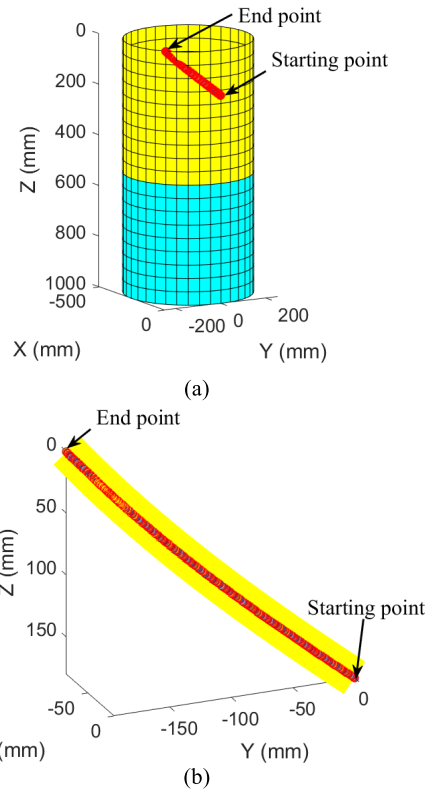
Helical seam weld beads on cylindrical surface of welded steel pipe end. (a) Seam weld beads to be removed and welded steel pipe. (b) Seam weld beads to be removed.
